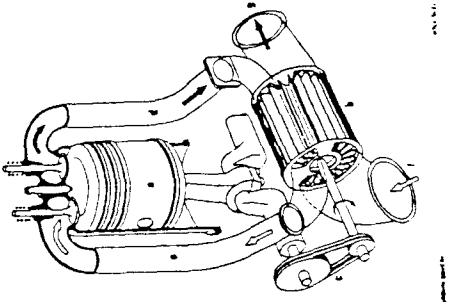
COMPRESX pressure-wave machine used for charging diesel engines
